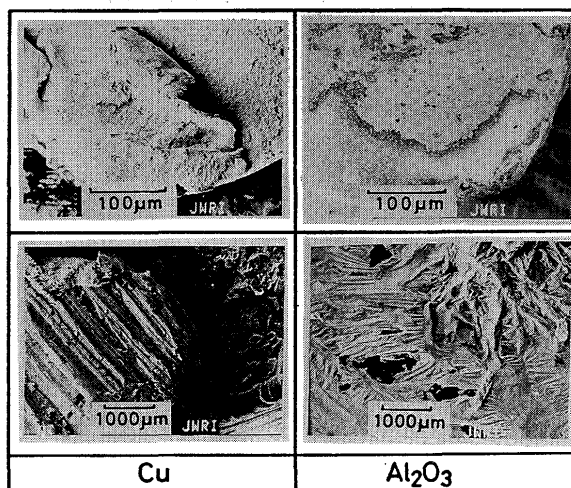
Fracture surface of $\text{Al}_2\text{O}_3/\text{Sn}/\text{Cu}$ joint soldered at 523 K for 60 s.
